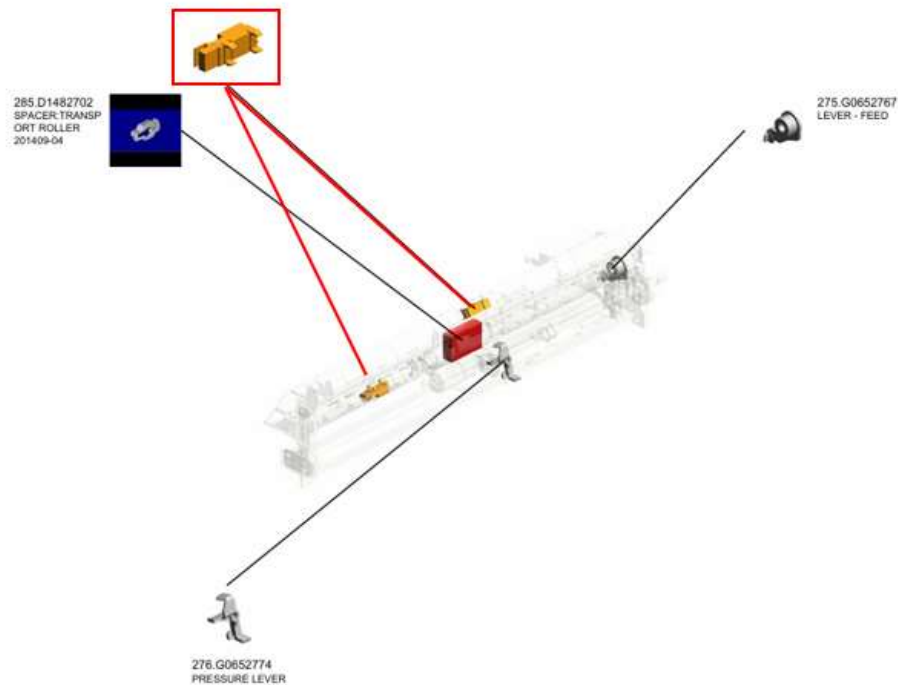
Position of the paper reading photoelectric sensor in the paper picking assembly [6]
